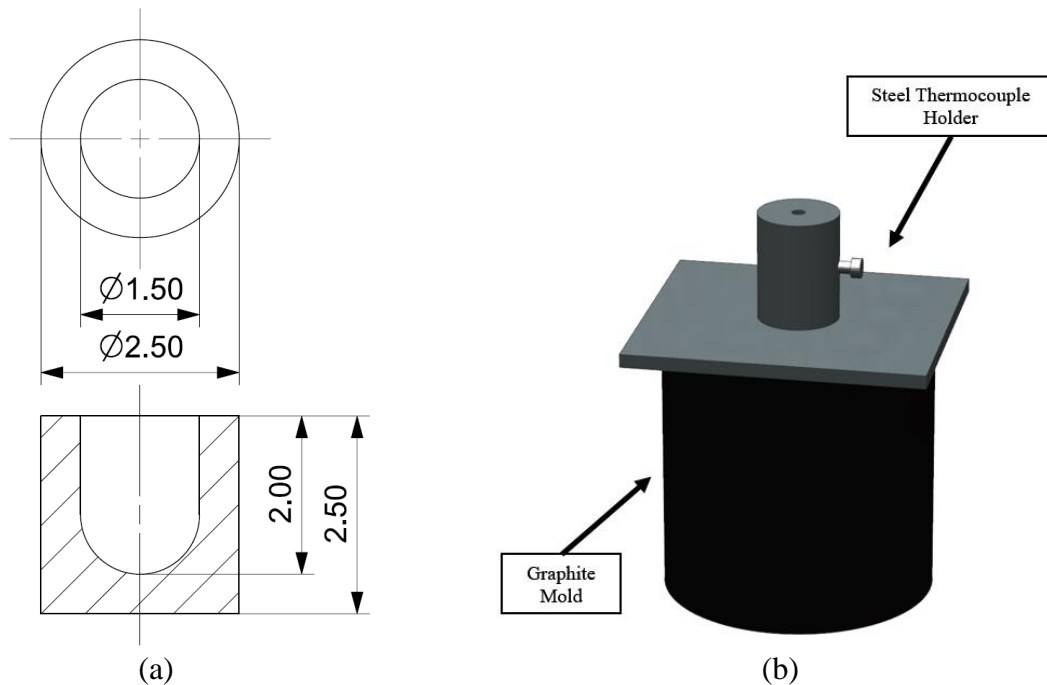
(a) Graphite mould dimensions (all dimensions are in inches) and (b) Graphite mould final assembly
